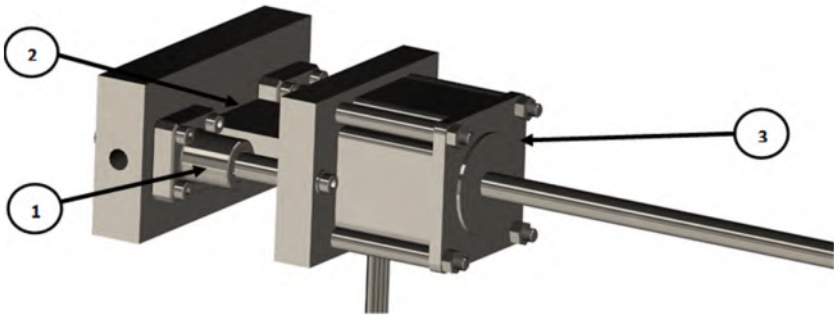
Representation of frame 2: 1. Nut for the spindle of the linear motor; 2. Bearing applied around the shaft; 3. Aluminum block.
